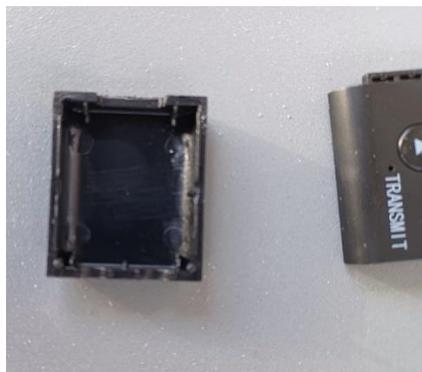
Metal shroud now removed and the base of the casing has been trimmed to remove the unwanted part of the casing.
